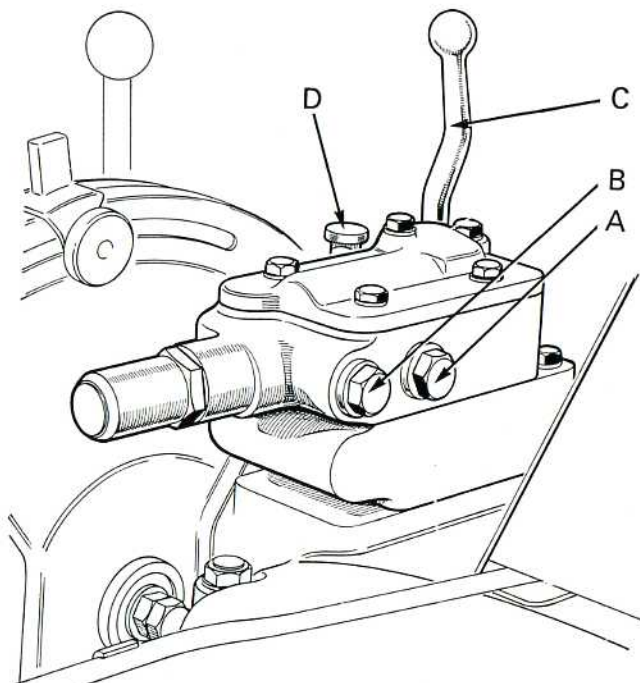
/12. LIVE, DOUBLE-ACTING, TAKE-OFF VALVE MOUNTED ON THE DISTRIBUTOR BLOCK
